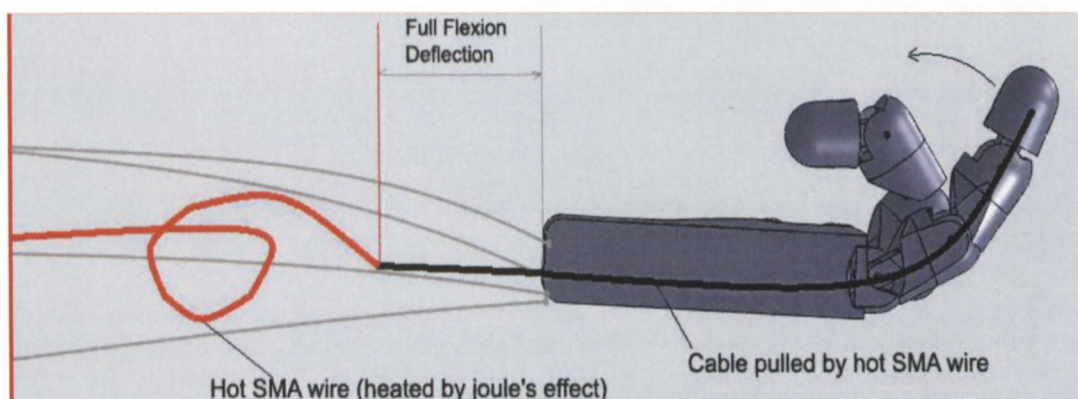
Cutaway drawing of the actuation mechanism (SolidWorks, Release 2010)
